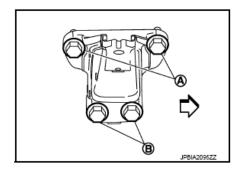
Engine Mounting Bracket (RH And LH) Upper And Lower Bolts With Tightening Sequence
